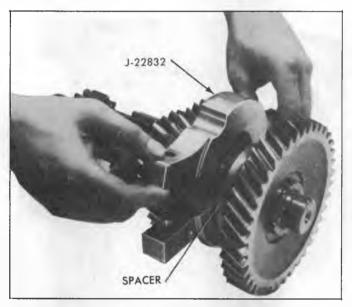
Q-Positioning Tool J-22832 On Countershaft
